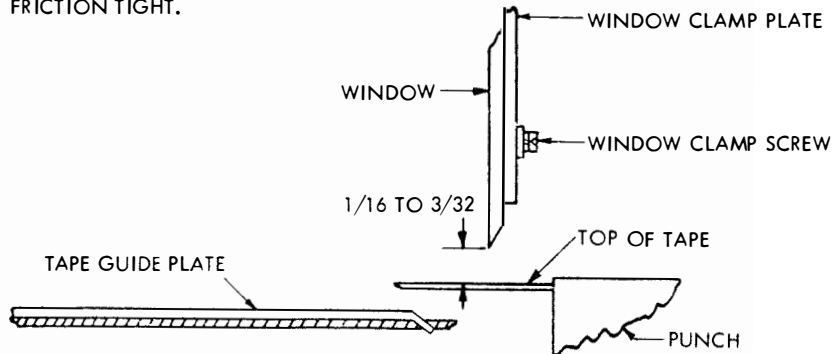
Cabinet, Base Plate and Window Alignment (TT-253/UG, TT-253A/UG and TT-292/UG)
